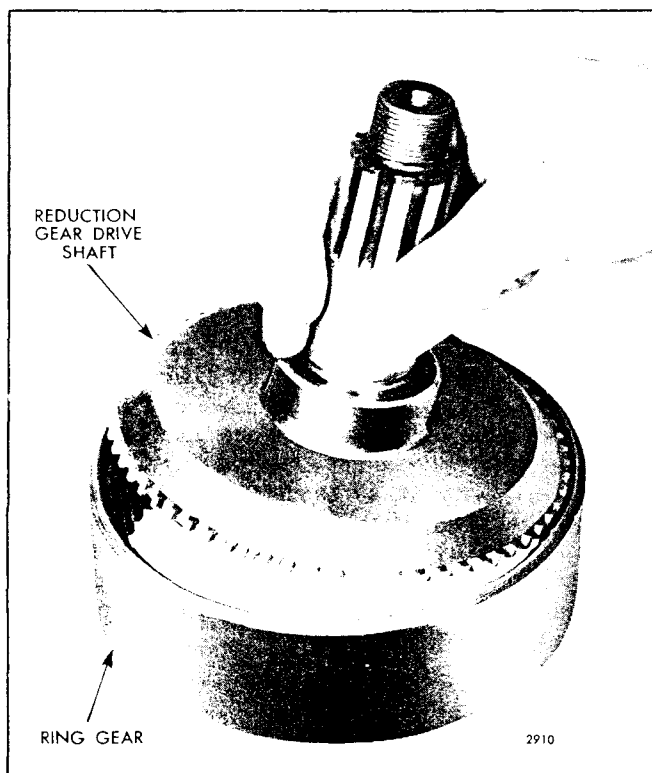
Installing Reduction Gear Drive Shaft in Ring Gear (2.1:1 Ratio)
